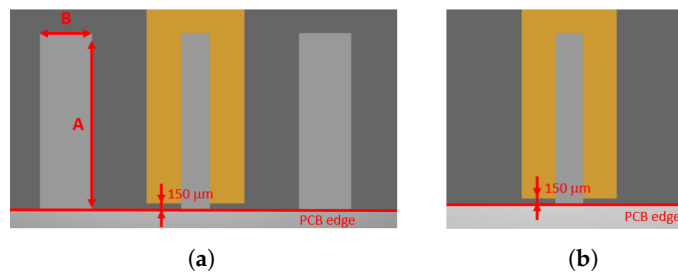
(a) PCB top view of signal launch used in PCB 1, PCB 2 and PCB 4. (b) PCB top view of signal launch used in PCB 3. The values for A and B are listed in Table 1.
